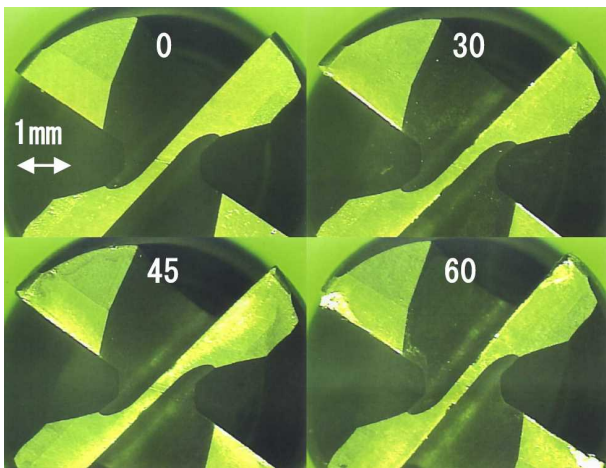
Photographs of cutting edge (Unequal helix Angle Endmill(C) Workpiece: SUS304)
